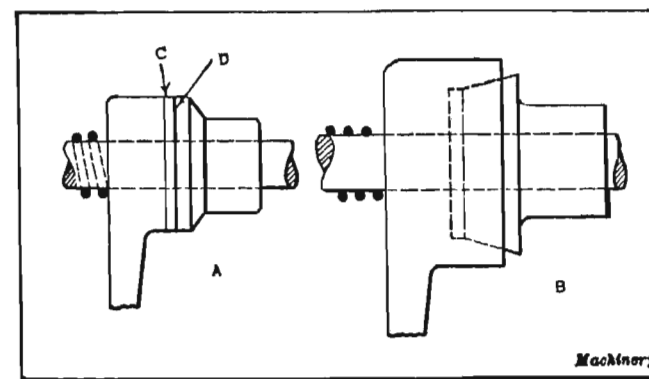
Two Friction Clutch Designs which may be Used with Carriers
